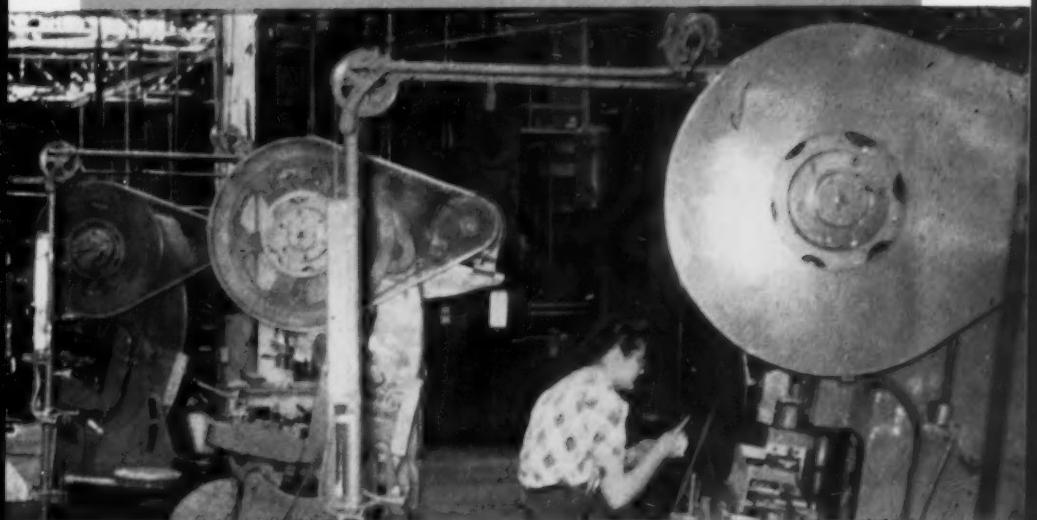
This illustration shows a line of small punch presses equipped with the pull-back guards. Also note the adequate clear-
